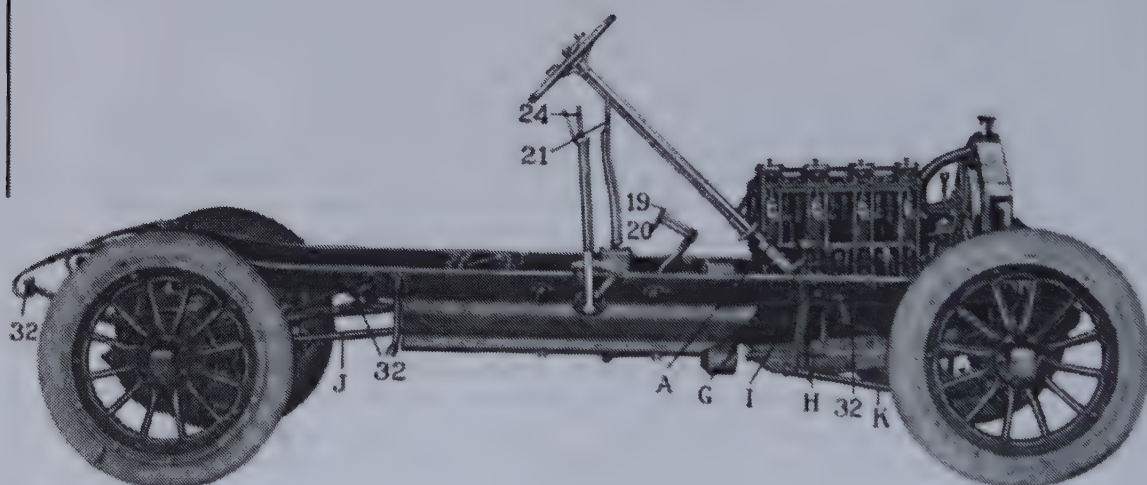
Another Type of Transmission; The Friction Drive. In this type the Clutch and Gearbox is eliminated.
